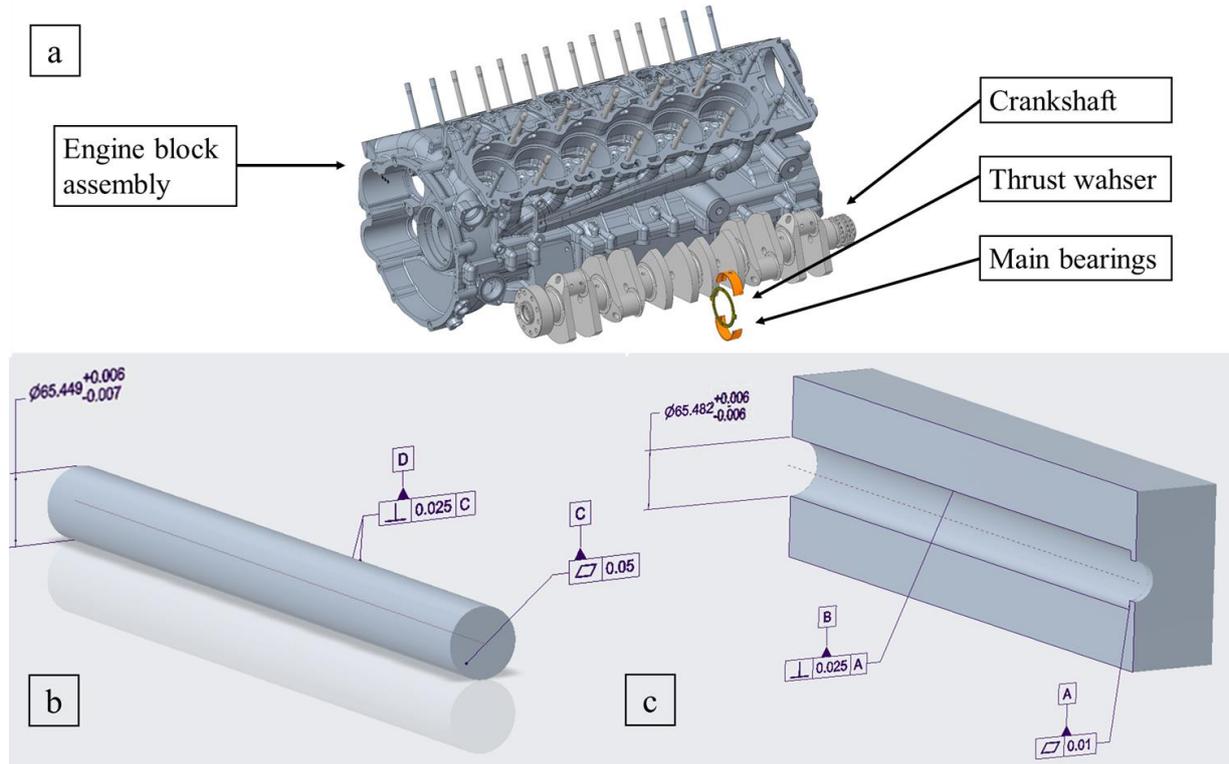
V12 engine assembly: a. original CAD models; b. simplified crankshaft; c. simplified engine block (section view)
